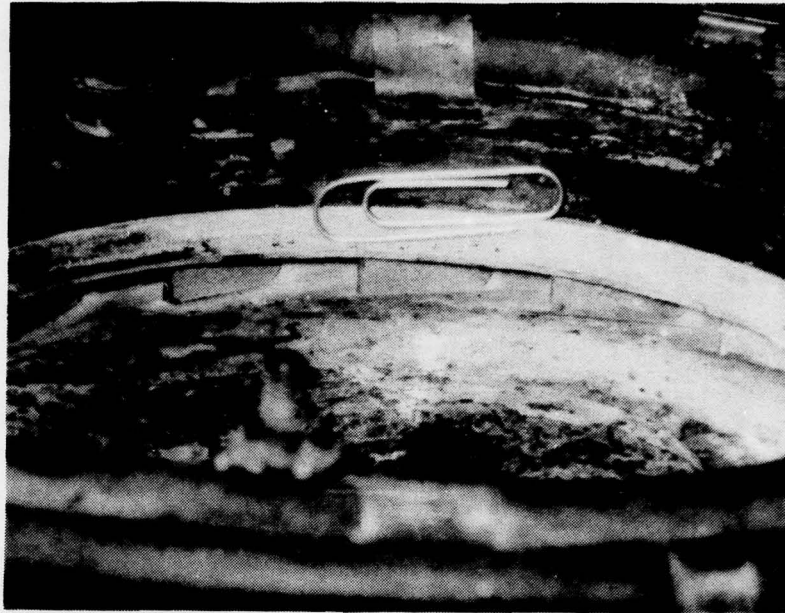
Downstream Side of Nozzle After Rig Corrosion Test
